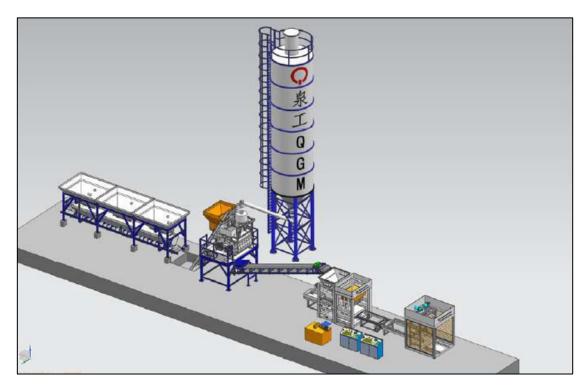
QT10 Automatic Block Making Machine (QGM Quangong Machinery Co. Ltd, 2021)
